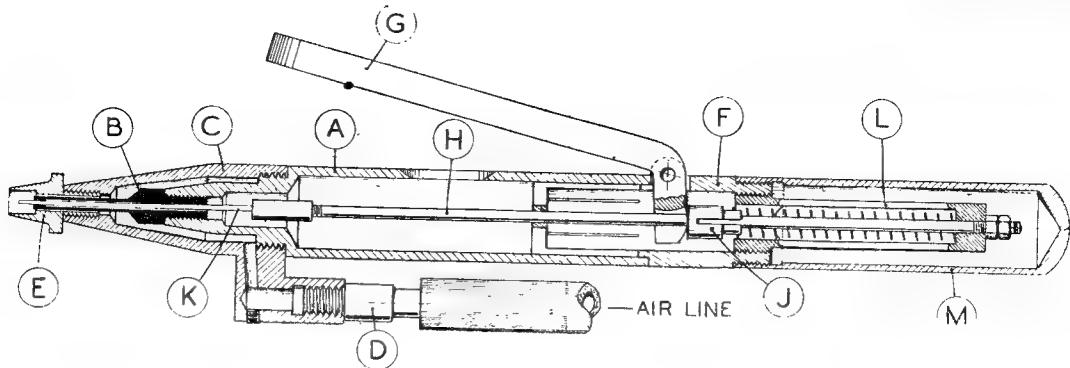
Sectional drawing of the gun. A—the body; B—the paint tube; C—the air sleeve; D—the pipe union; E—the nose cone; F—the valve spindle housing; G—the trigger; H—the valve spindle; J—the valve spindle collar; K—the paint needle; L—the valve spindle guide; M—the cap
